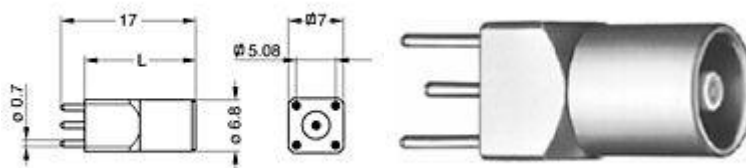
LEMO EPA.250.00.NTN dimensions and drawing
